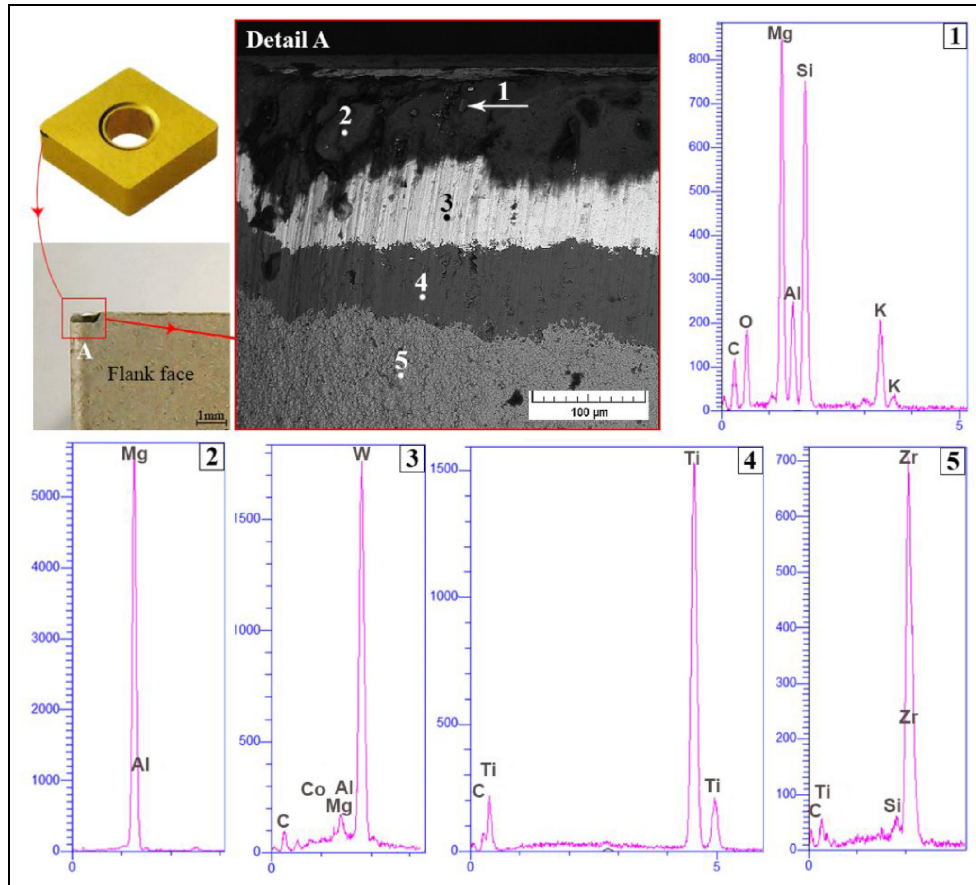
EDS analysis of the tool flank face when it is worn out in dry machining of AZ91/SiC composites.
